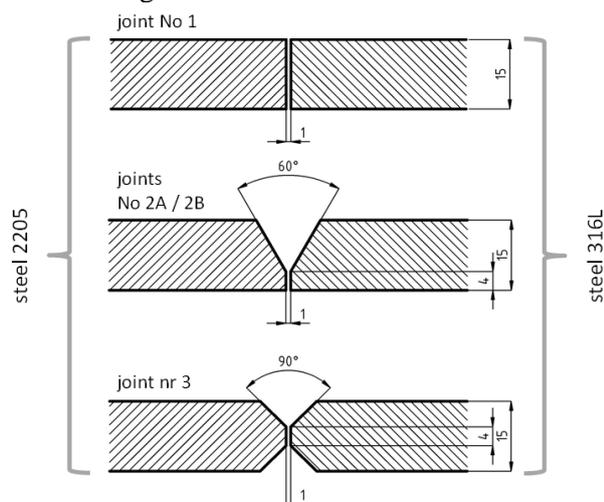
Edge preparation for analyzed welded joints, [own elaboration]
